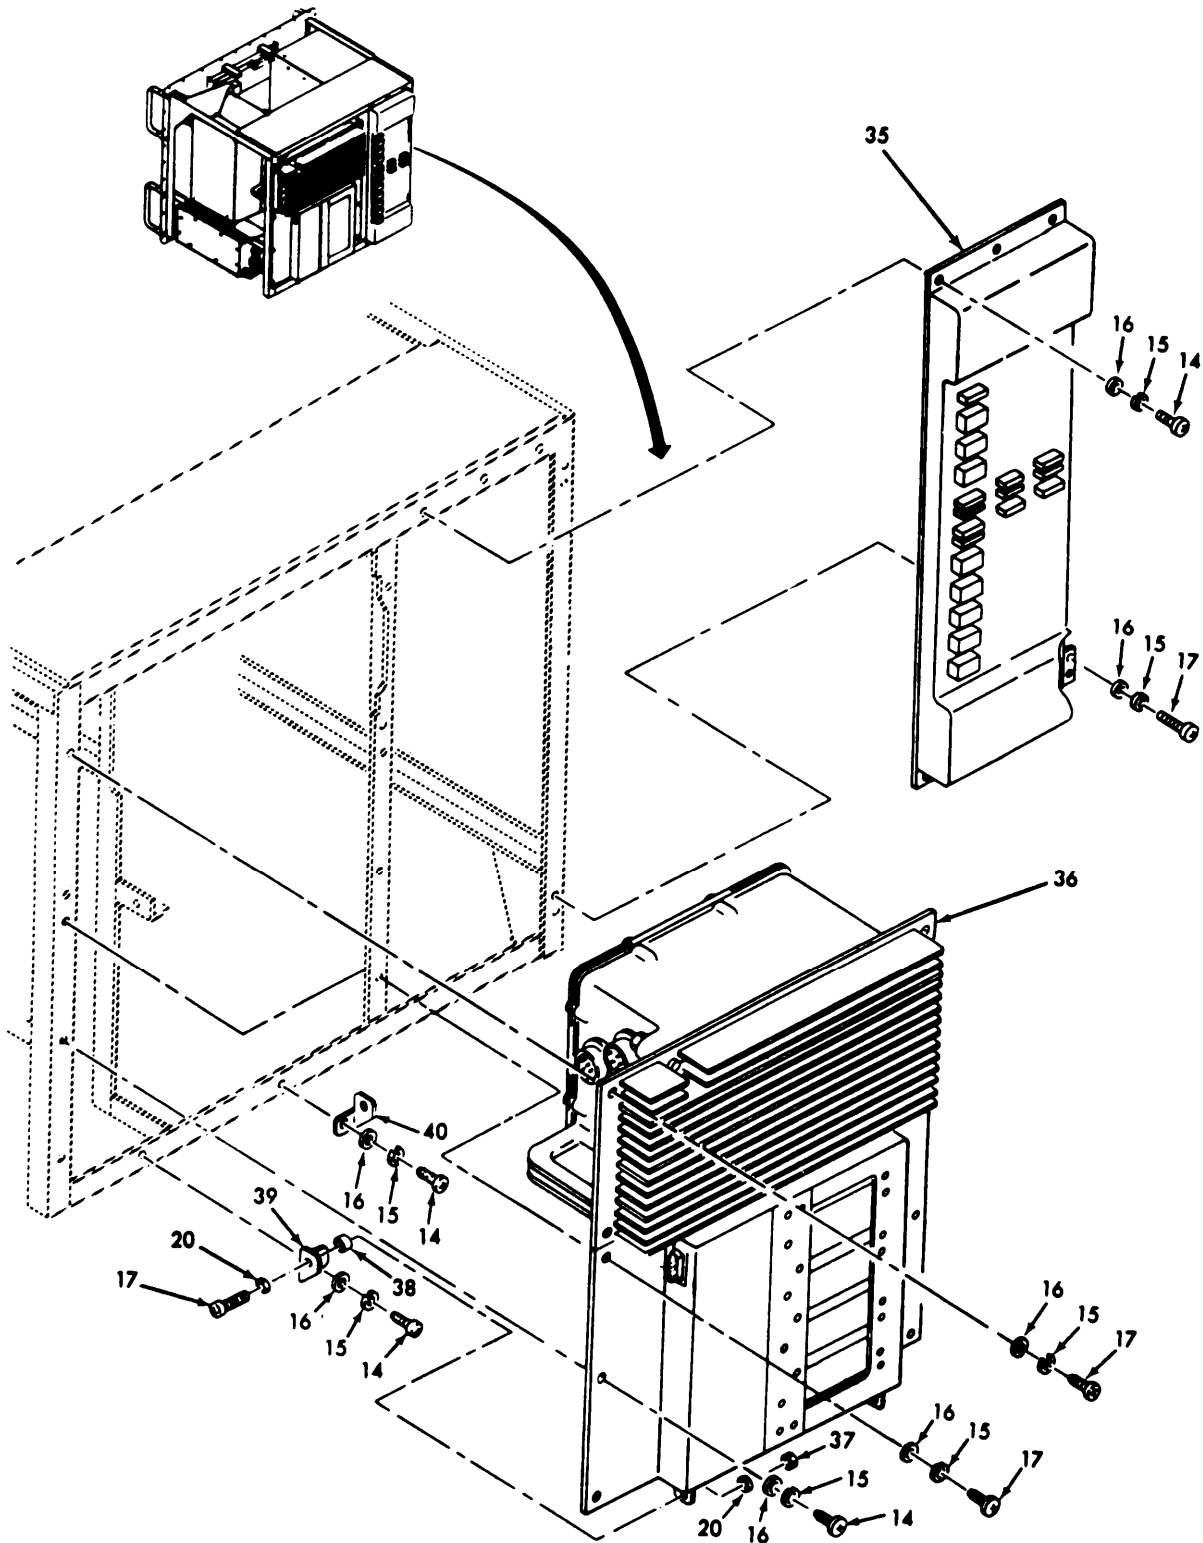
THERMAL SYSTEM TEST CONTROLLER CHASSIS
